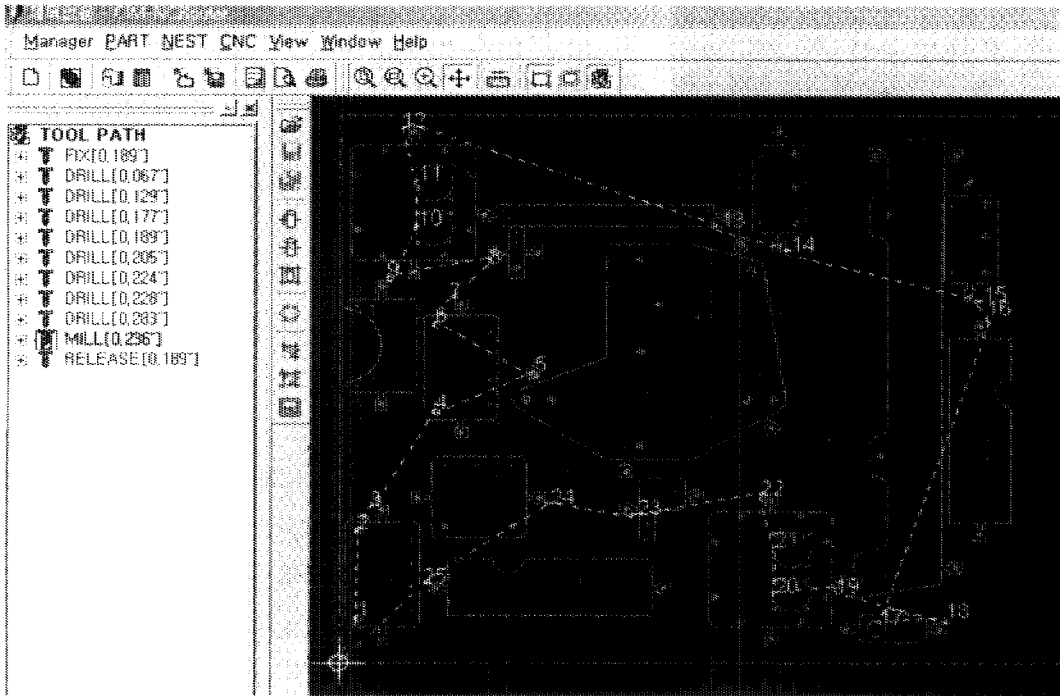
Optimal path for a milling tool(0.236" dia.).
